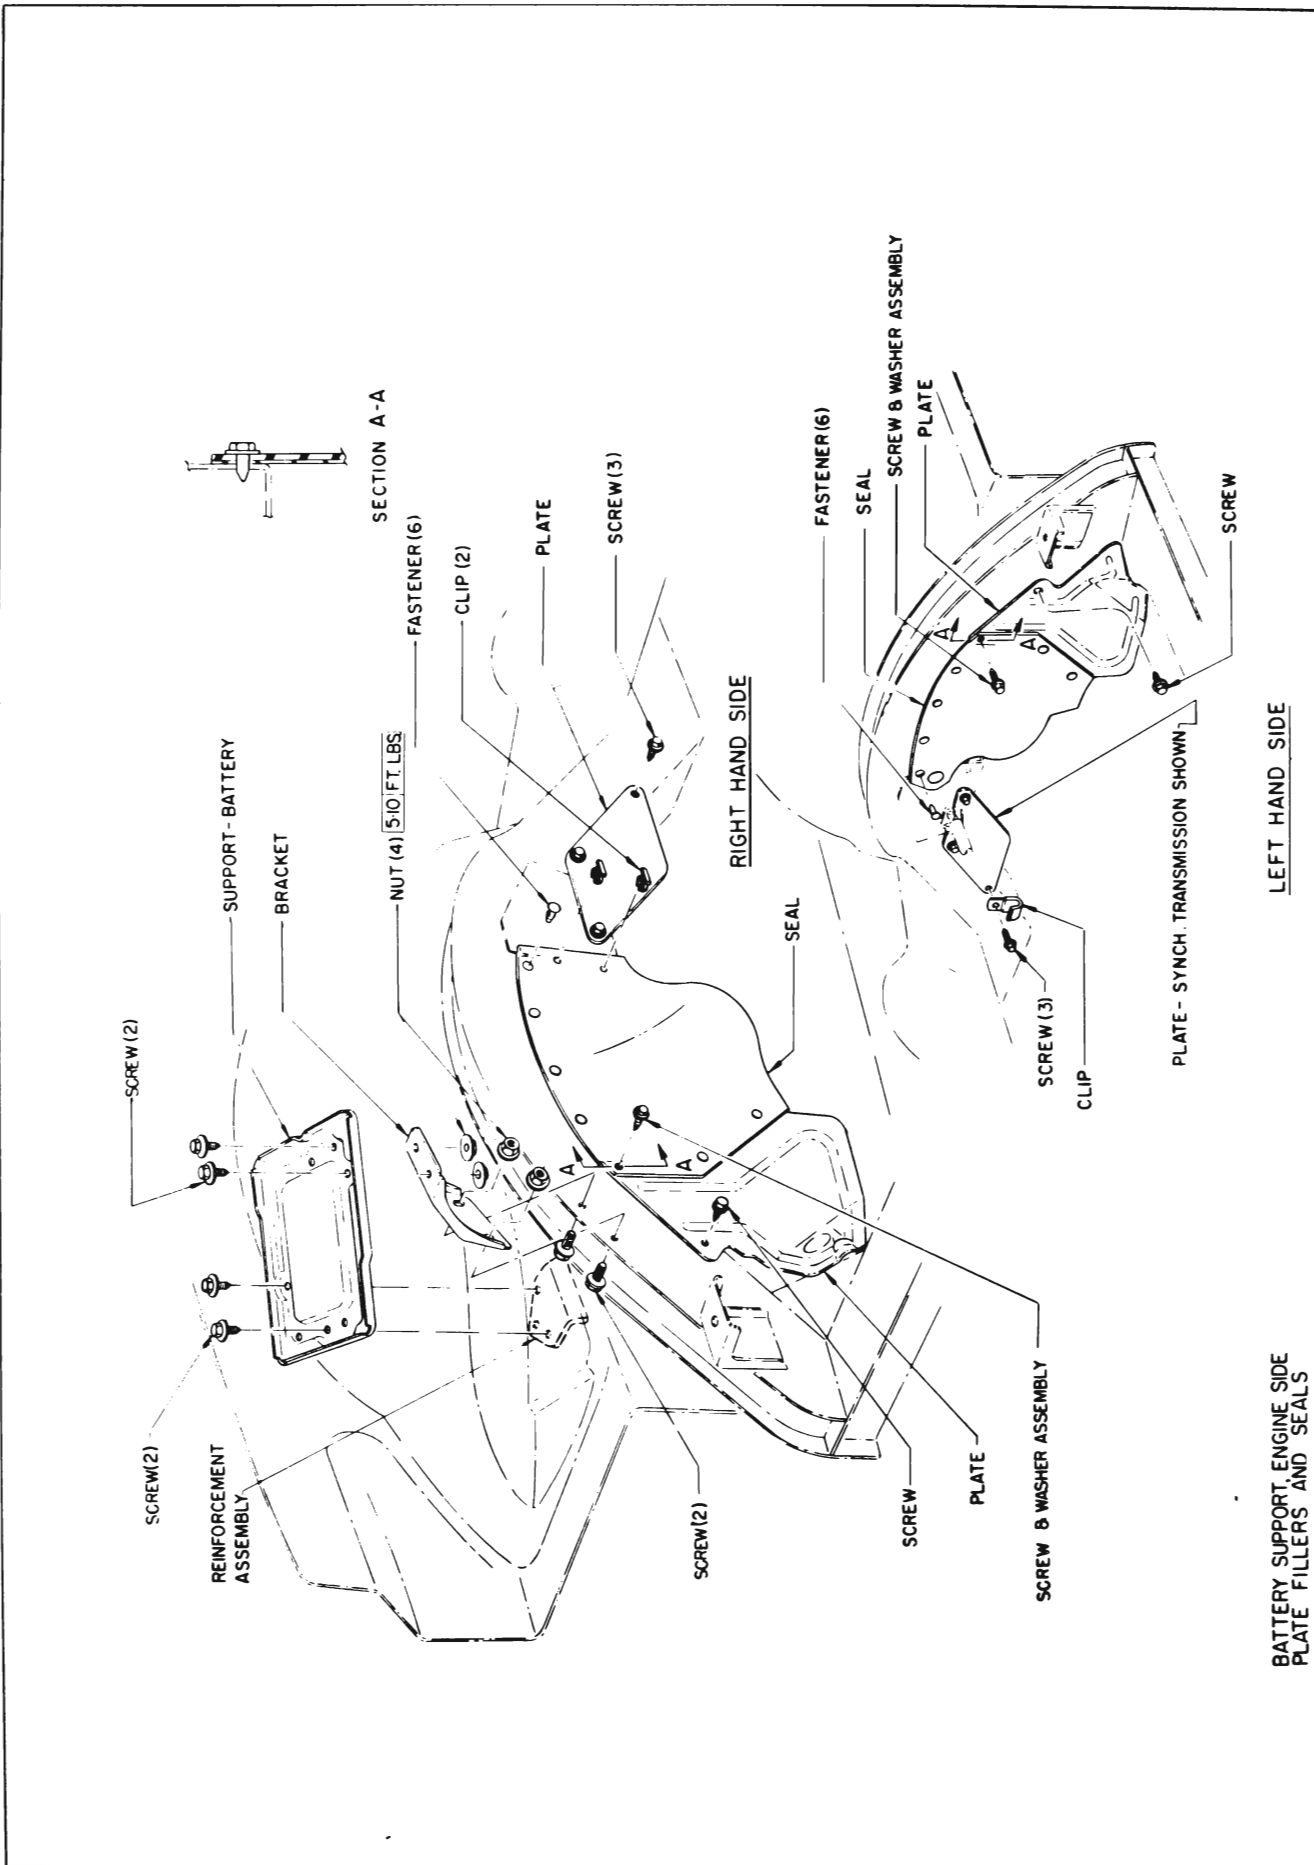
Battery Support Engine Plate Fillers and Seats Installation
